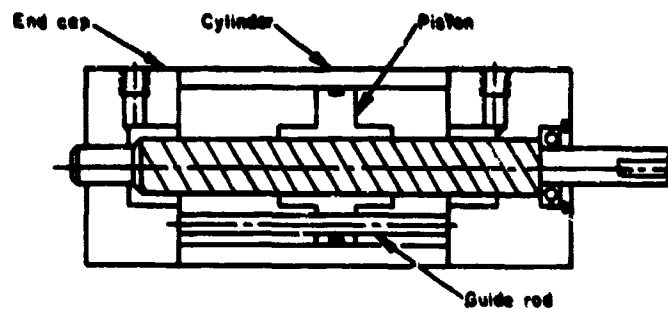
Helical-Spline Rotary Piston-Cylinder Actuator
